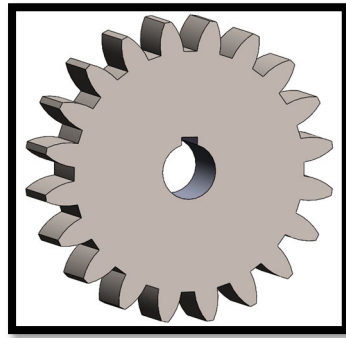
Pinion gear that directly fits the motor and gearbox to actuate the rack and gripper handles and translates rotational movement to linear.
